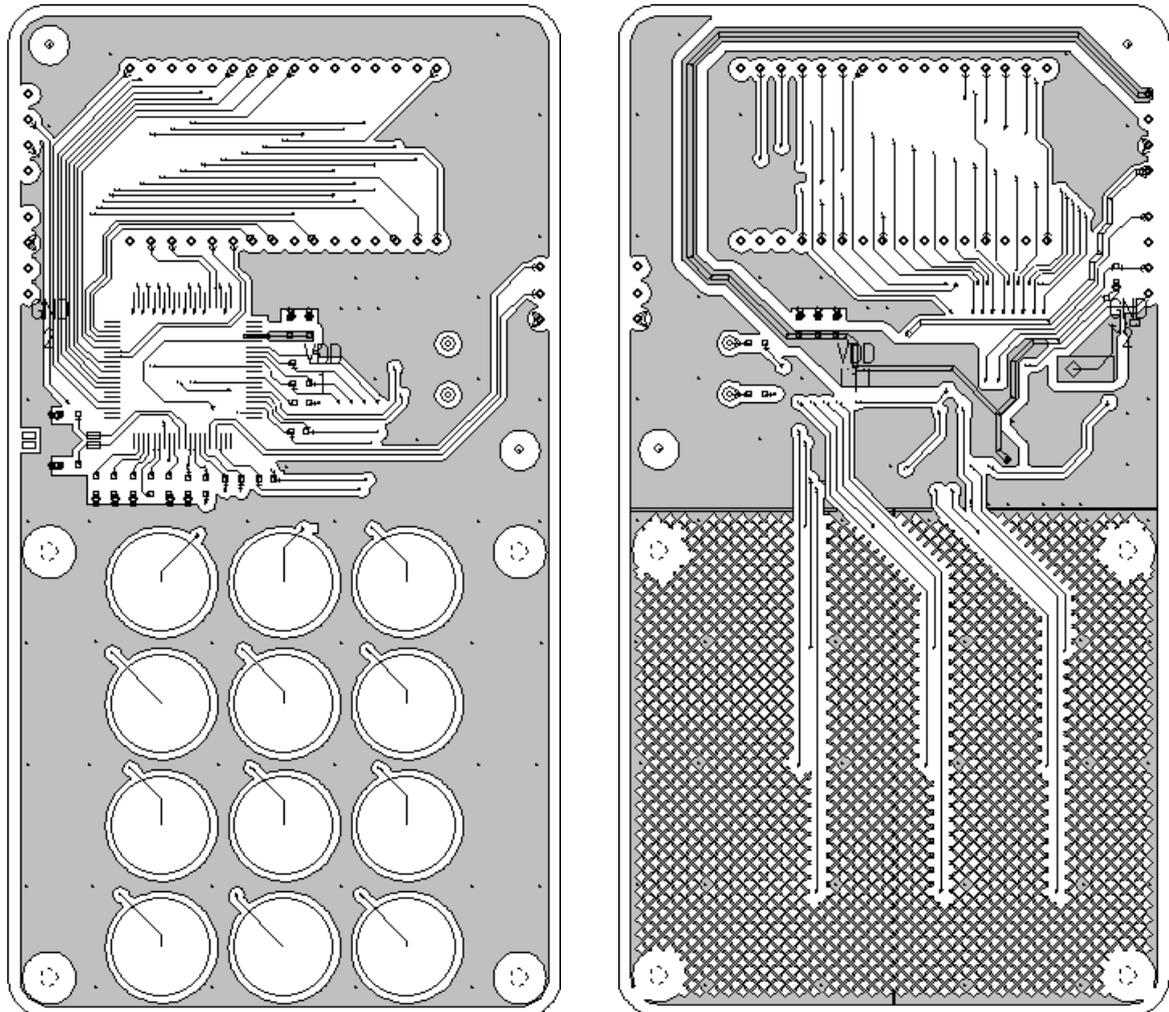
Conductor Pattern of the S5U1C17656T Board (Front and Back)
